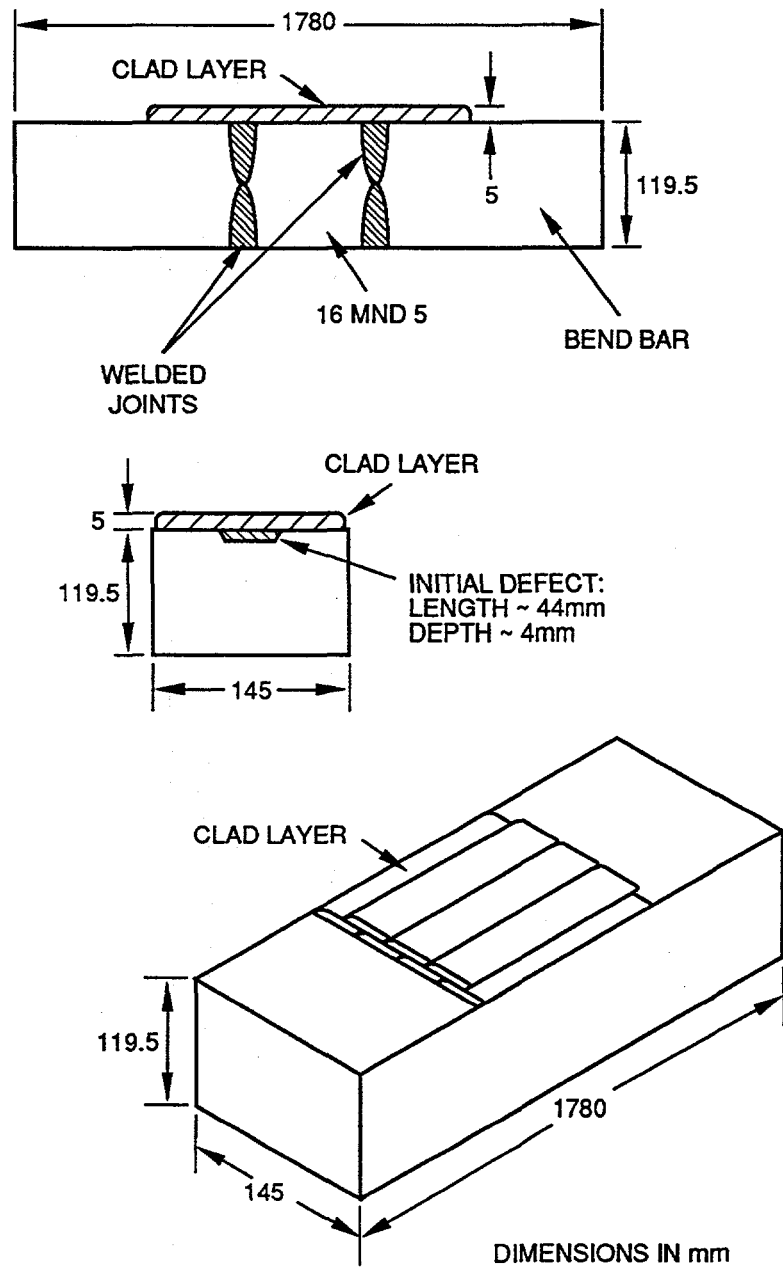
Clad bend-bar specimen containing an underclad crack (DD2 and DSR3; EdF)
